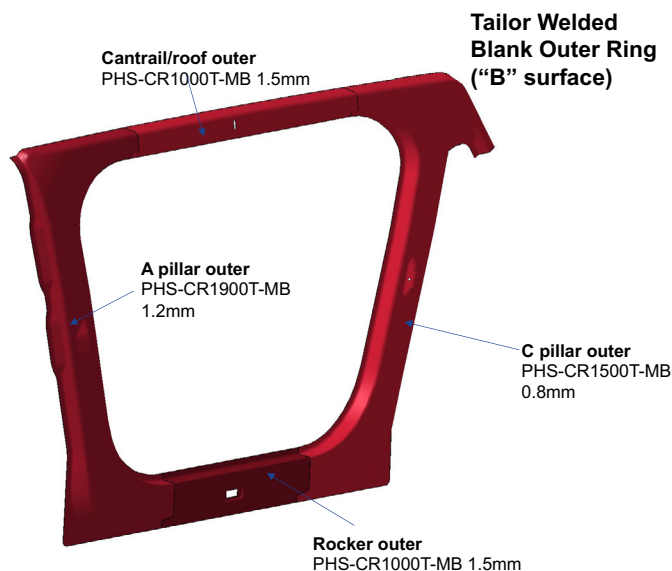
SEM BIW door ring outer. Four-part tailor welded blank, single hot stamping
